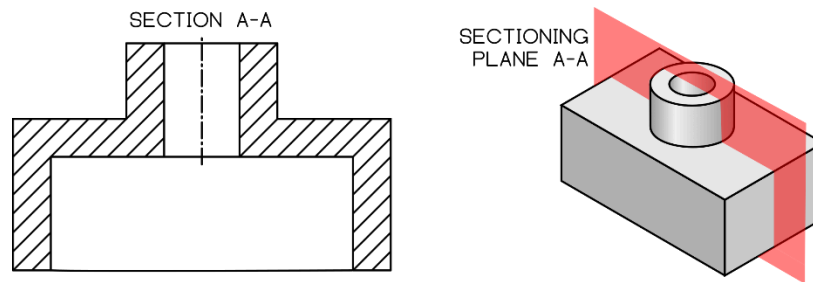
Fig. for Question 4 – Motor housing. For reference, the overall size of the workpieces is approximately 100 x 50 x 50 mm. The wall thickness is approximately 5 mm. Drawing not to scale.
